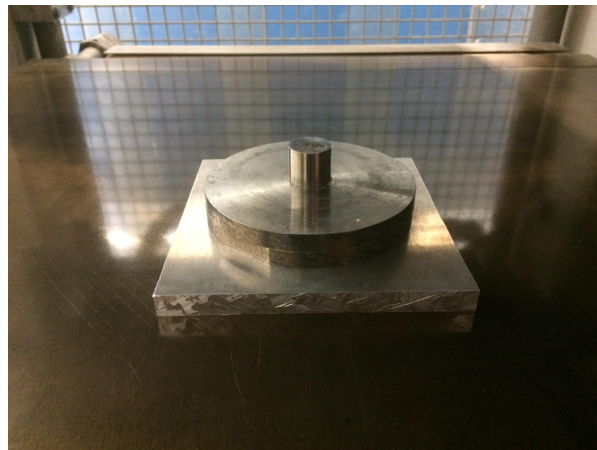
Mold in place in Joos Press with bottom protective plate
